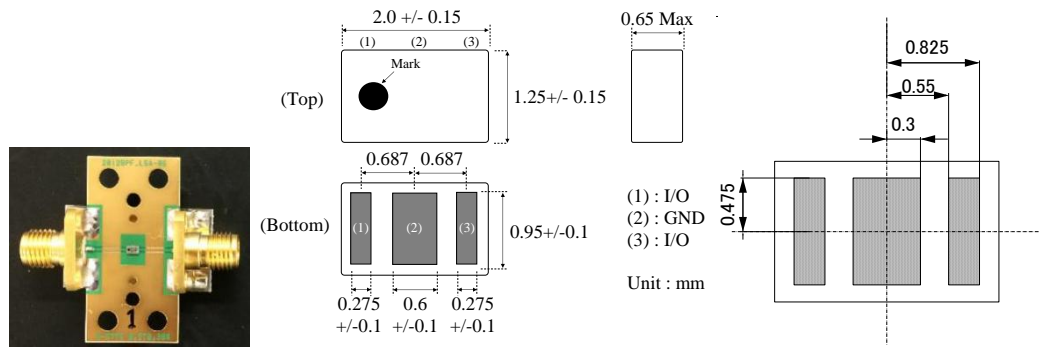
Multilayer Ceramic Filter with its evaluation board (example photo), Dimension and footprint
